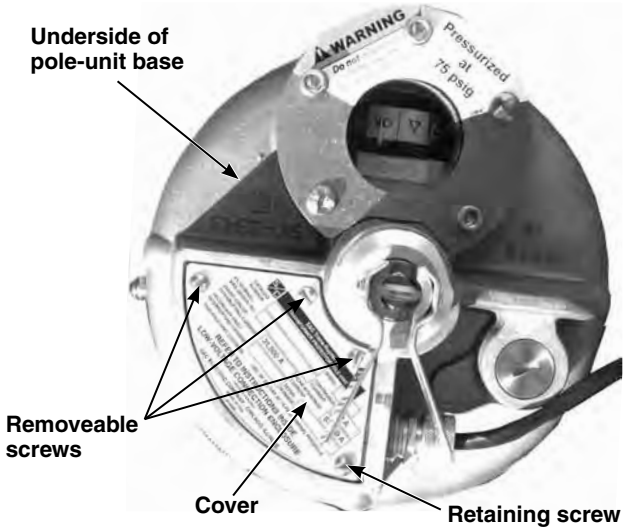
Remove the three removable screws at each pole-unit electrical junction box cover. Loosen the fourth retaining screw.
